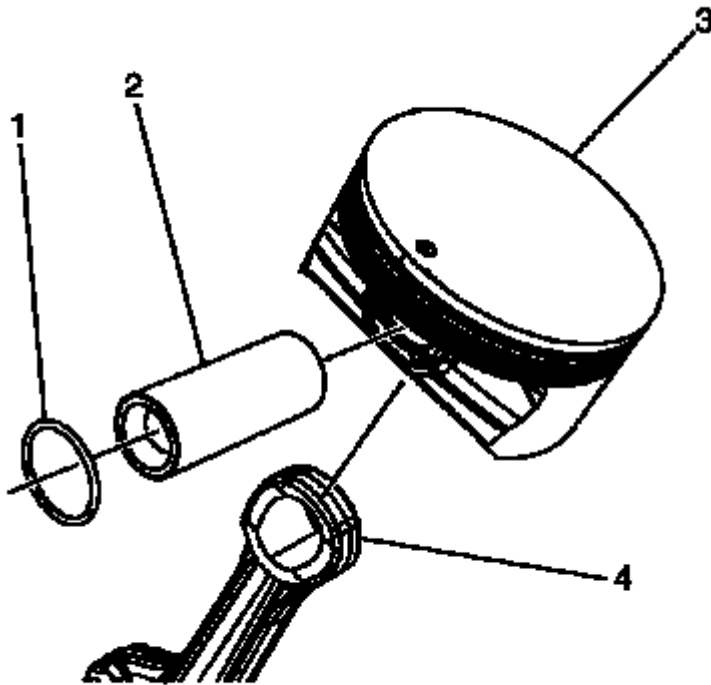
View Of Retainer, Piston Pin, Piston & Connecting Rod
